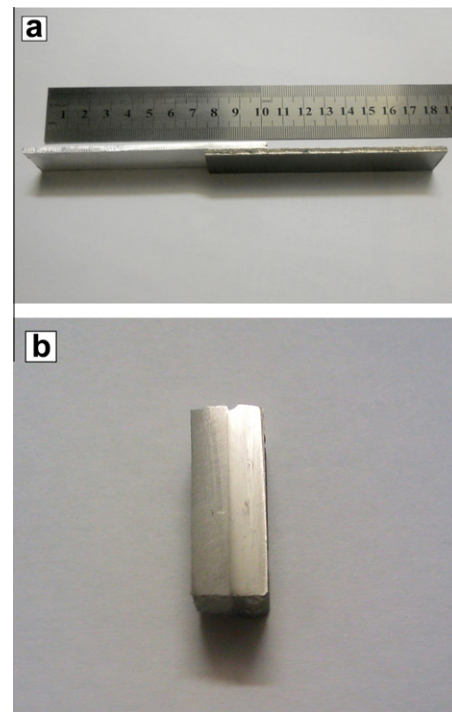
(a) Lap shear tensile test specimen and (b) cross section of a diffusion bonded sample.
